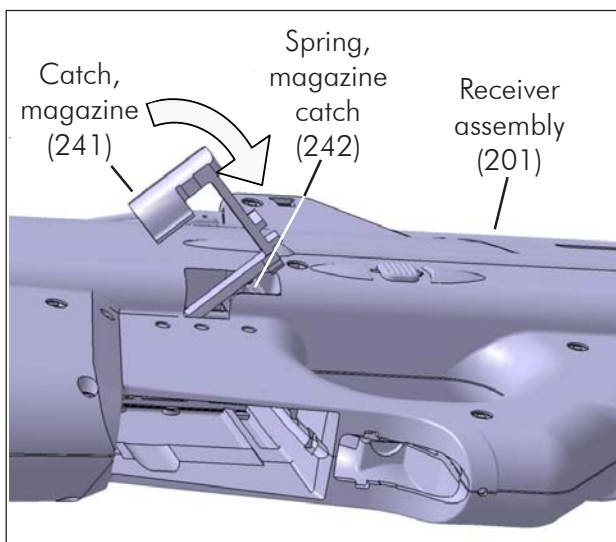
g - Reassembly of the catch, magazine (241)
